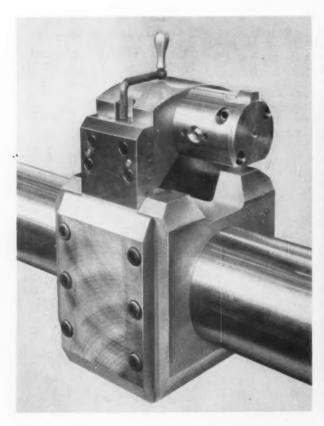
Davis extension type boring head for large-diameter work, product of Giddings & Lewis Machine Tool Co.
